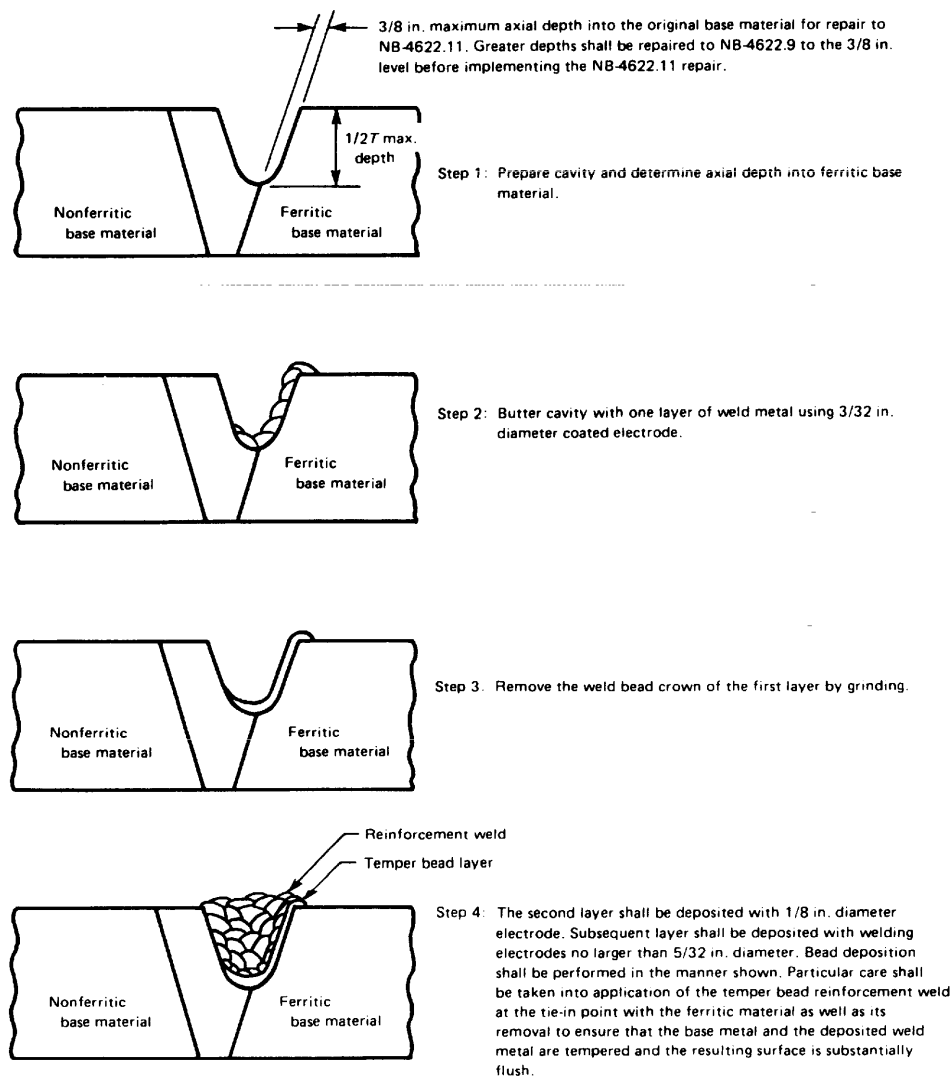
(c)(6)-1 TEMPER BEAD WELD REPAIR AND WELD TEMPER BEAD REINFORCEMENT OF DISSIMILAR METAL WELDS OR BUTTERING
